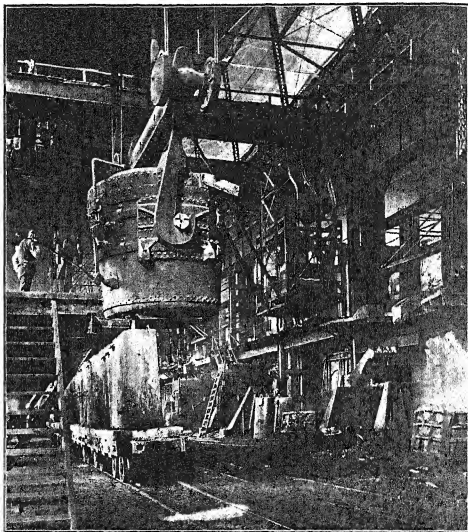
Open Hearth Furnaces. Pouring Ingots.
